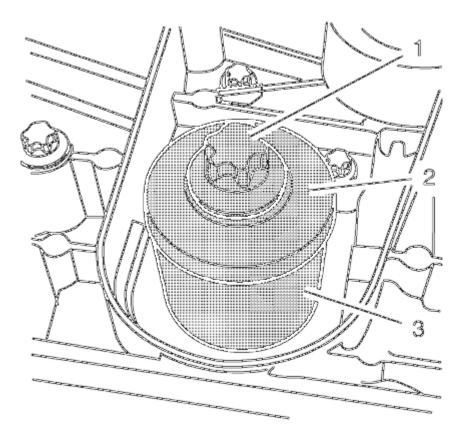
View of Exhaust Camshaft Actuator Courtesy of GENERAL MOTORS COMPANY
